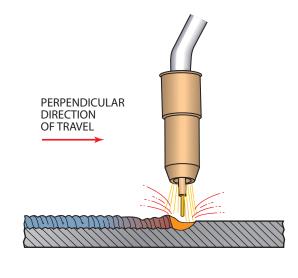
Forehand welding or pushing angle.
